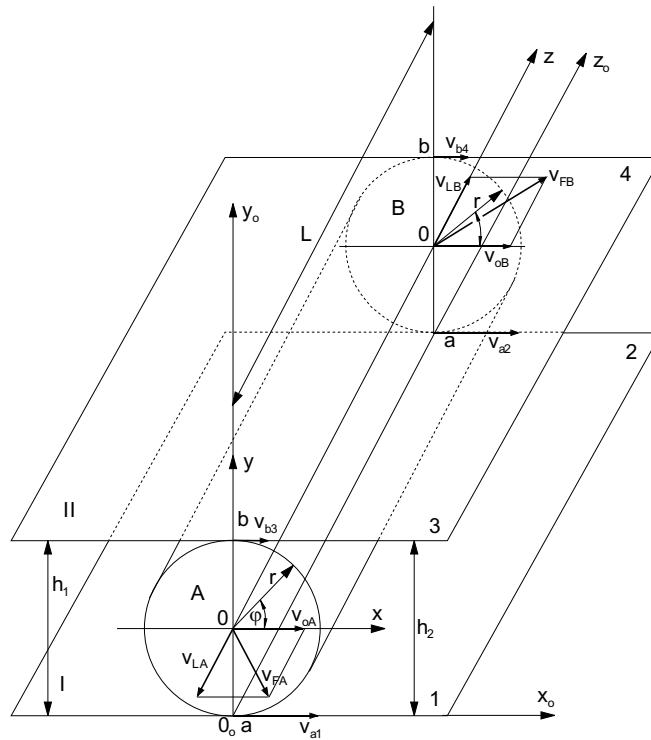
The configuration of forming cylindrical shapes between moving working surfaces I and II
